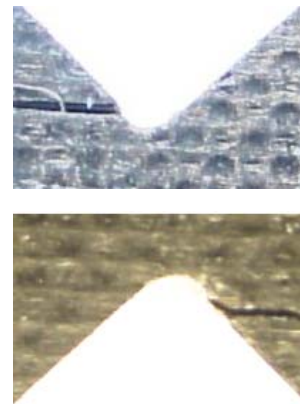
Photo images of first and second cracks occurred at notch roots in 0° specimen
